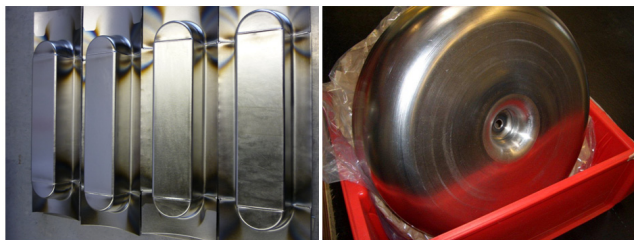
Pictures of the welded girders (left) and end caps of the cavity tank (right). Property of RI.
